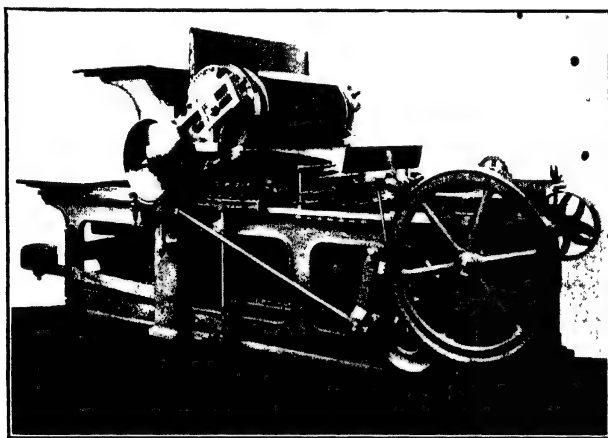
Furnival & Co's Tinplate Printing Machine.
